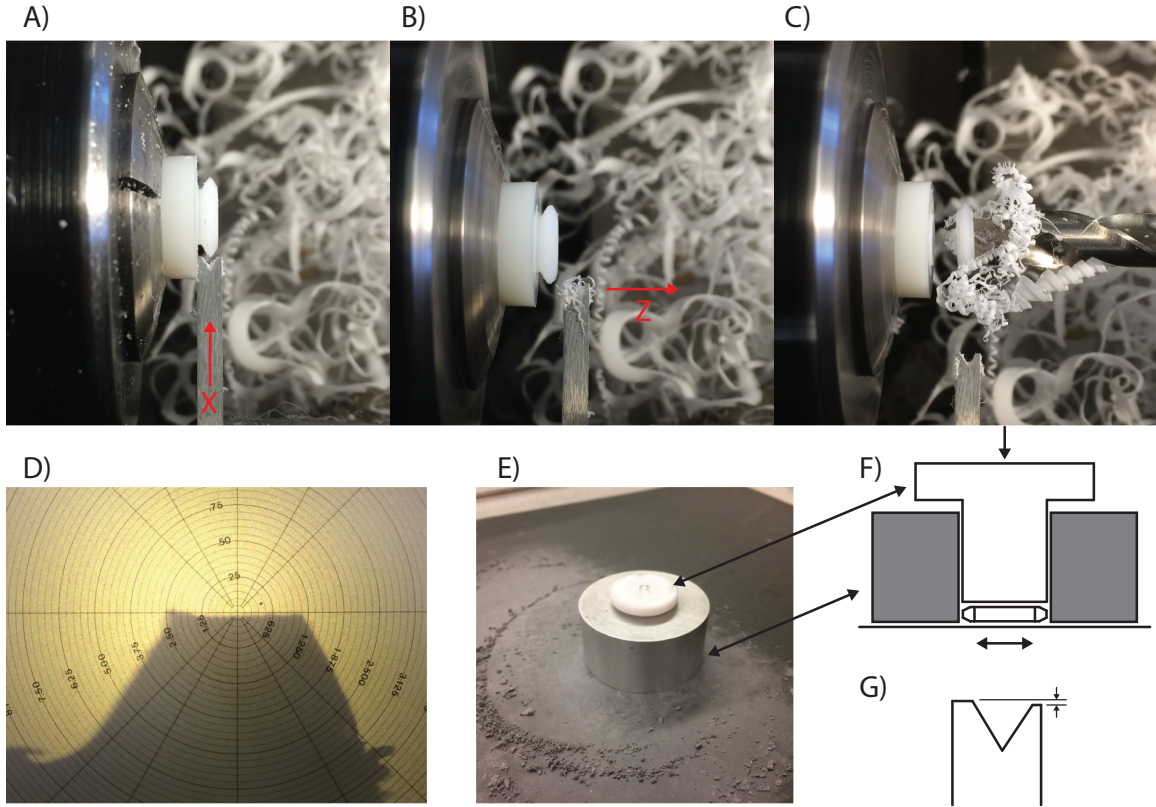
Fabrication of the chamfered retaining ring. *A)* First, a custom-ground cutoff tool is advanced in the x direction to shape the two chamfers. *B)* The cutoff tool is then retracted to a second position and moved in z while the left edge of the cutoff tool cuts the required outer diameter. *C)* A final drilling operation both machines the inner diameter and separates the ring from the stock. *D)* The ring profile is checked with an optical comparator. The outside edge (at center of cross-hairs) is 0.5 mm wide. *E)* The top and bottom of the ring are sanded flat using an aluminum and Delrin fixture. *F)* A section of the sanding fixture shows how the Delrin plunger pushes the retaining ring flat while the aluminum cylinder constrains it. *G)* A diagram of the cutoff tool shows the v-groove that defines the chamfers, and the left side edge of the tool that extends further than the right and defines the outer diameter of the ring.
